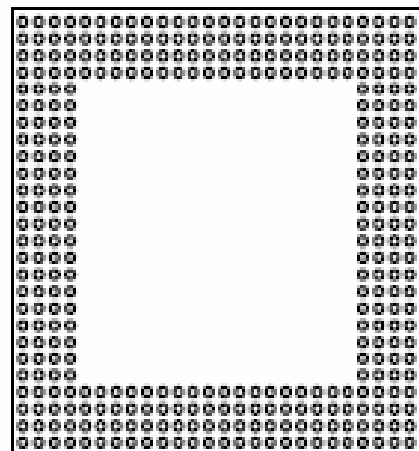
Package Dimensions and ball layout for the PBGA package used for this study [Sekisui 2005]
